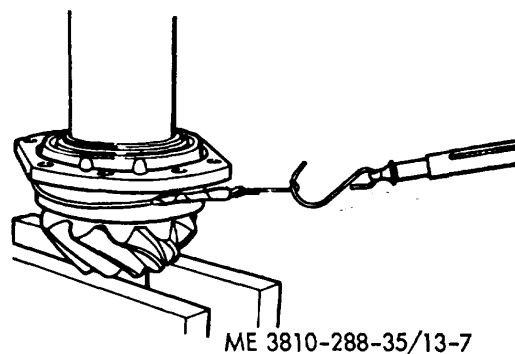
Measuring pinion bearing preload torque (rear-rear axle).
